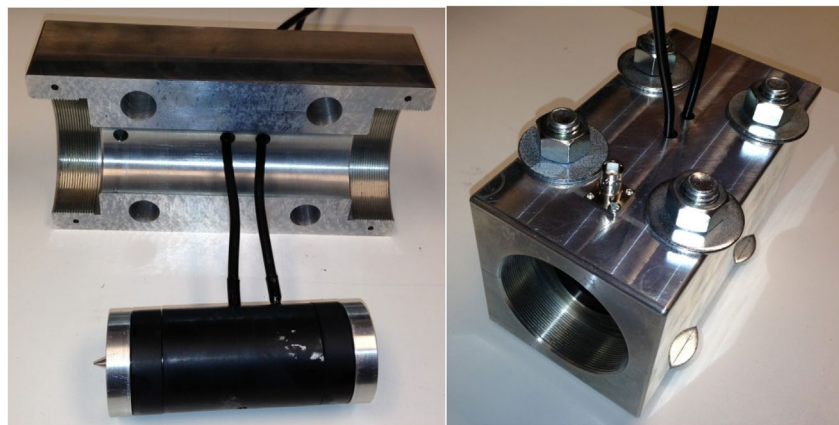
Sensor split housing design enables the assembly of the sensing unit and connection to cables (left) and complete assembly of the sensor (right).
